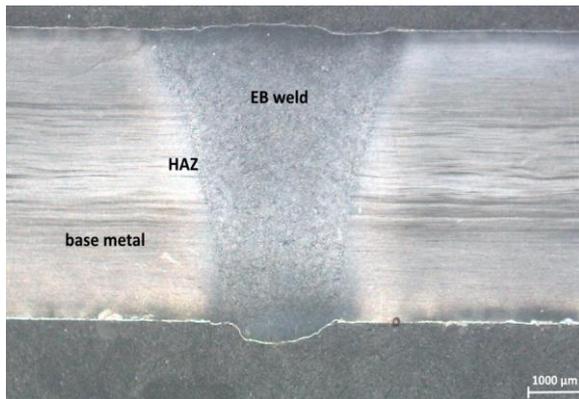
Macrostructure of cross-sectional view of the EBW joint with 15 mm.s^{-1} welding speed and welding current 53 mA
